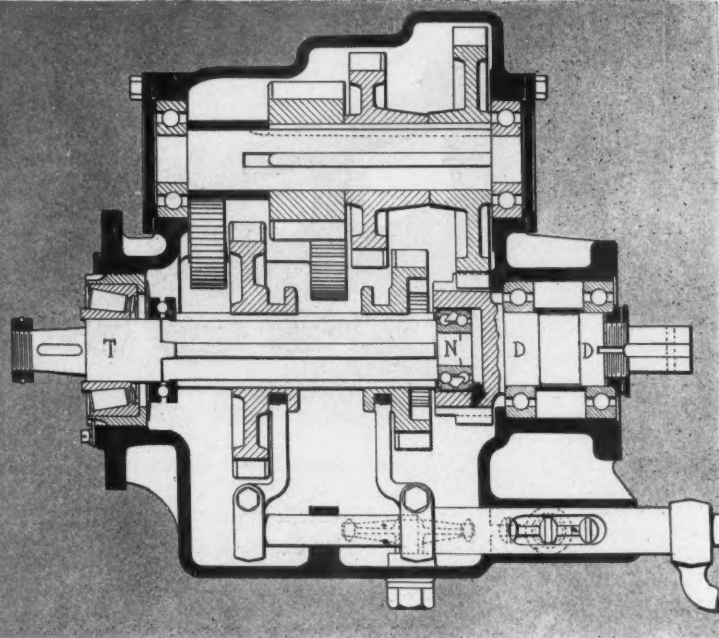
OVERLAND 61 SELECTIVE GEARSET
